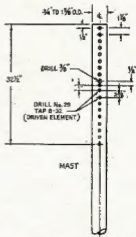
Sketch showing drilling pattern of the mast. Except as indicated, holes are made with a No. 43 drill and tapped for 4-40 machine screws, and are spaced 1½ inches apart. The mast section should be of aluminum or steel, and at least 5 feet long.
